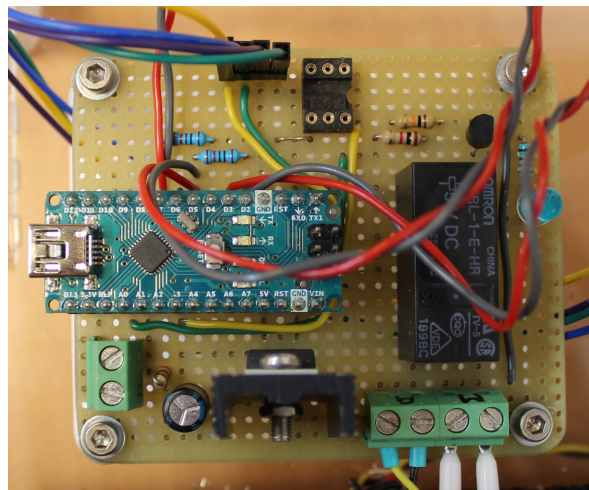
Electrical circuit soldered onto a prototyping board
